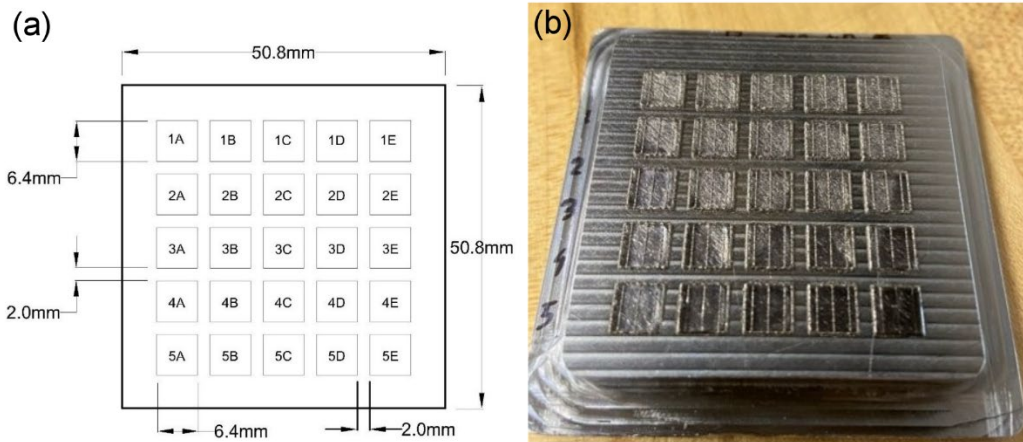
(a) Detailed dimension of the test series, and (b) SLM fabricated samples.
